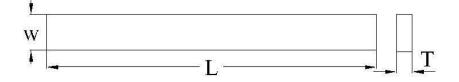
Schematic diagram of flexural test specimen, ASTM D790 dimensions
